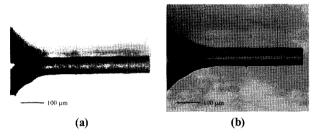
Tool electrode shape: (a) before coating (diameter: 73 μm), (b) after coating (diameter: 78 μm)
